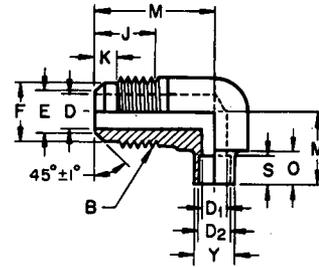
FLARE TO SOLDER 90 DEG REDUCING ELBOW
